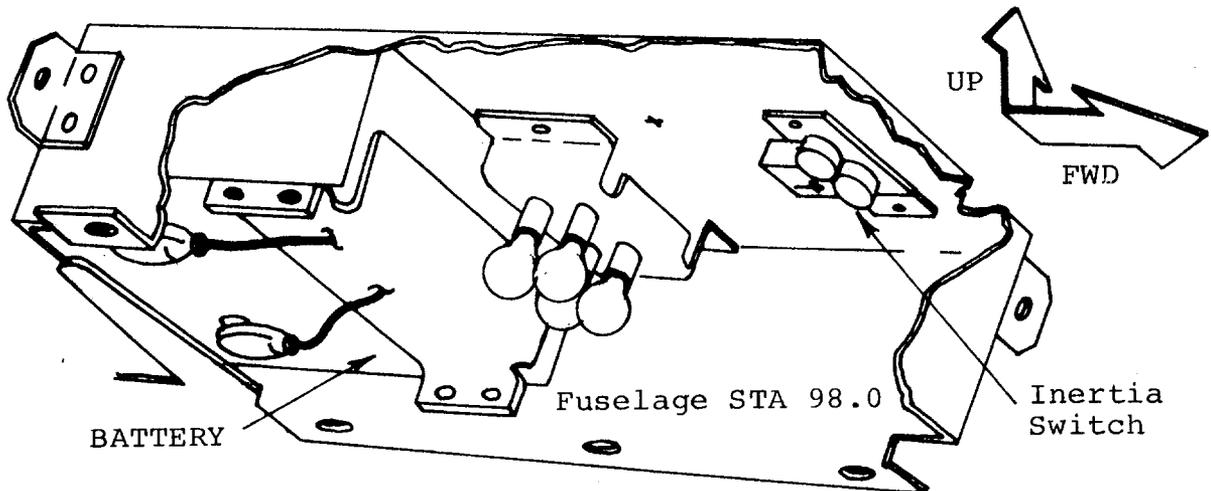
B: EMERGENCY LIGHT ASSEMBLY
